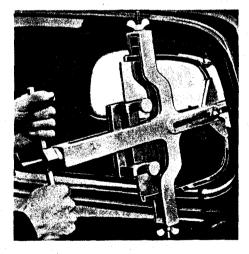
Illustration No. 120 Tool For Removing and Installing Ventilator Glass.
